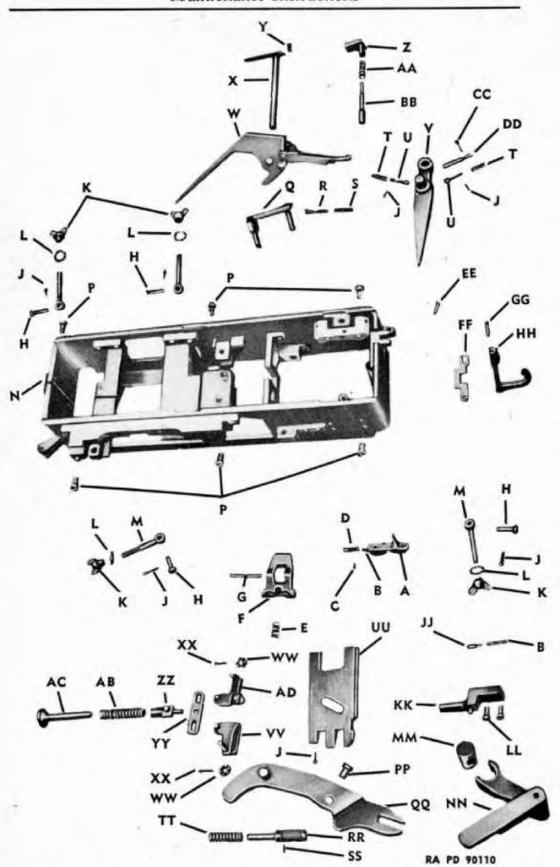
Parts of Left-hand Feed Box and Feed Mechanism (Gun M10)
